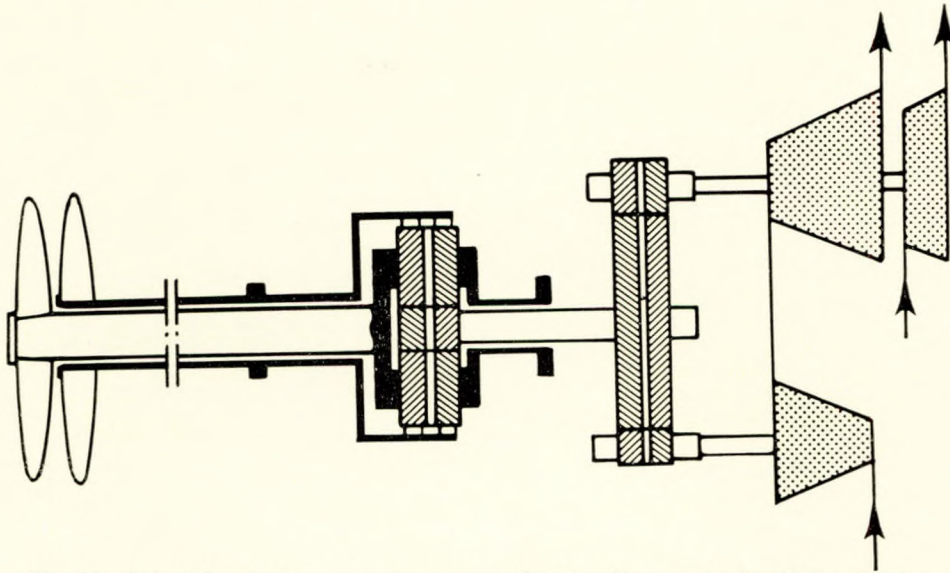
Principle of contra-rotating gear with epicyclic gear in the final reduction
